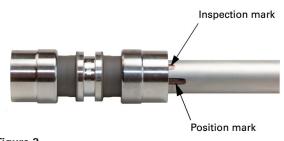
Application of tube insertion marks using RSTG0-01-SIZE marking gauge and pen.
